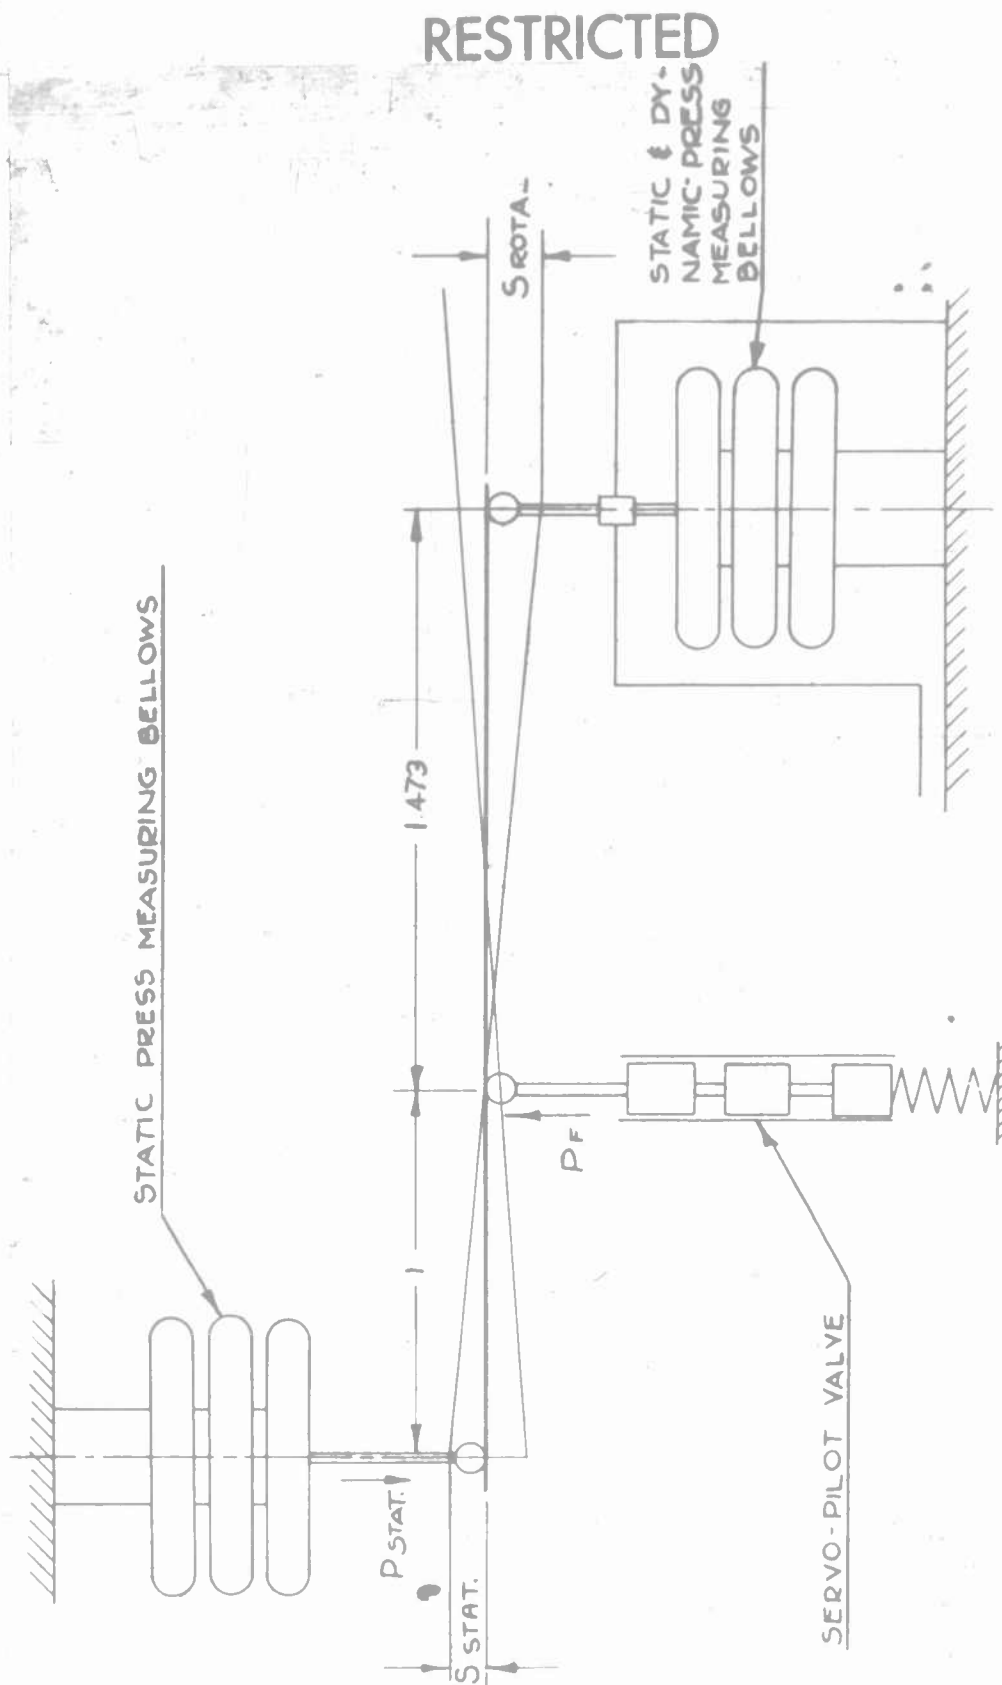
Schematic Arrangement - Mach Number Regulator (APJ Drawing No. 05-950-03-00)
